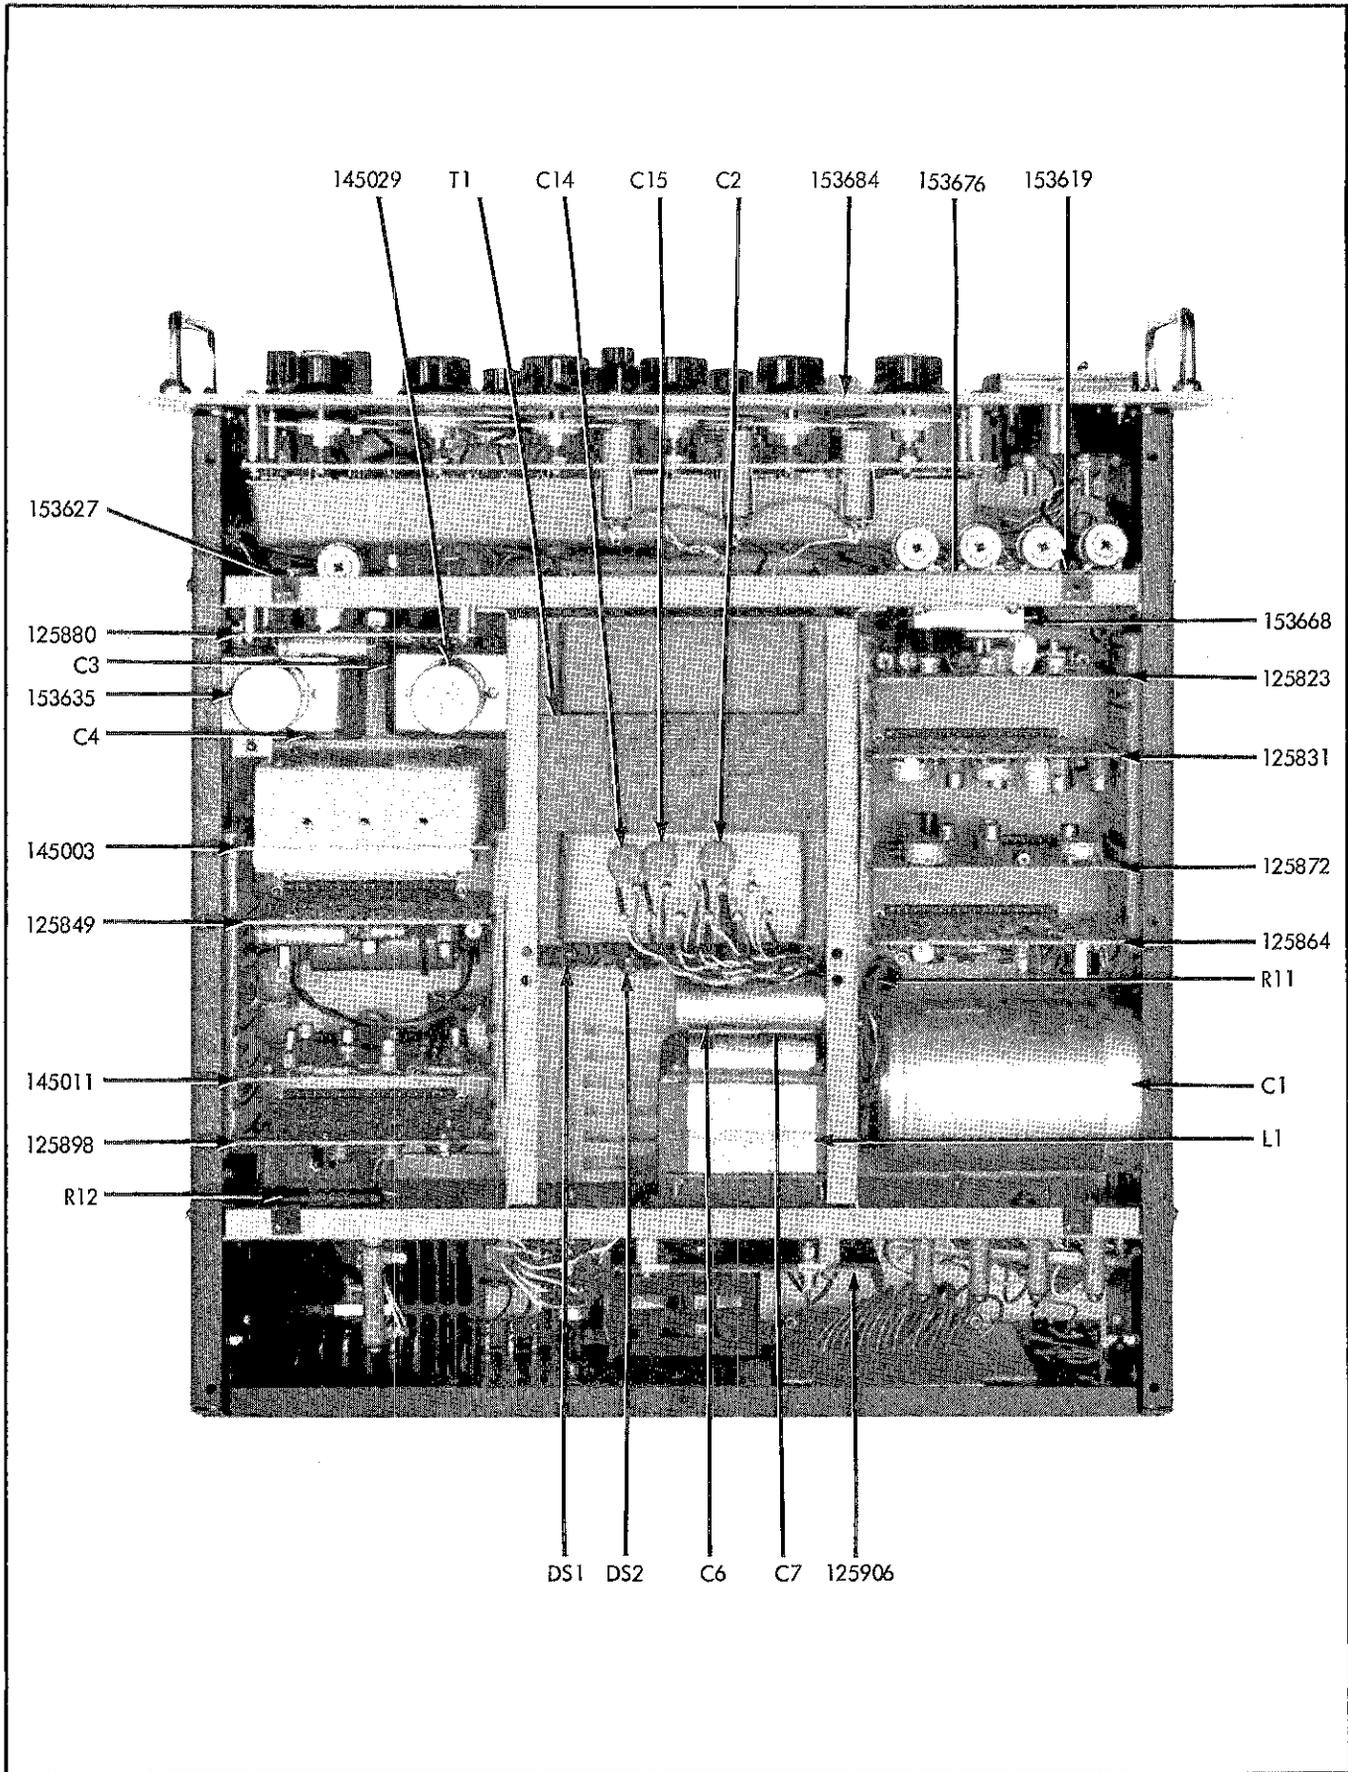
FINAL ASSEMBLY (sheet 1 of 2)
